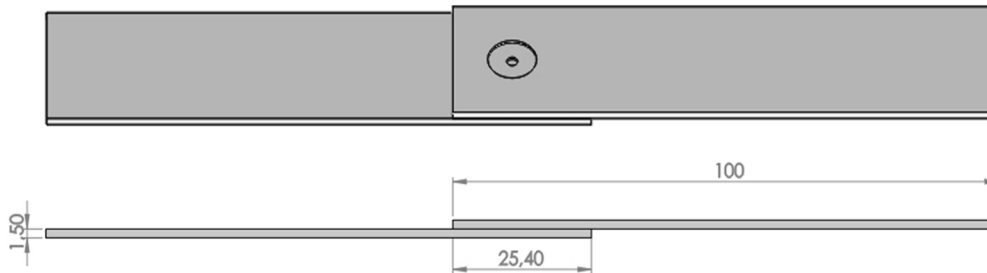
Schematic illustration of the welded specimen for lap shear test and its dimensions in millimeters.
